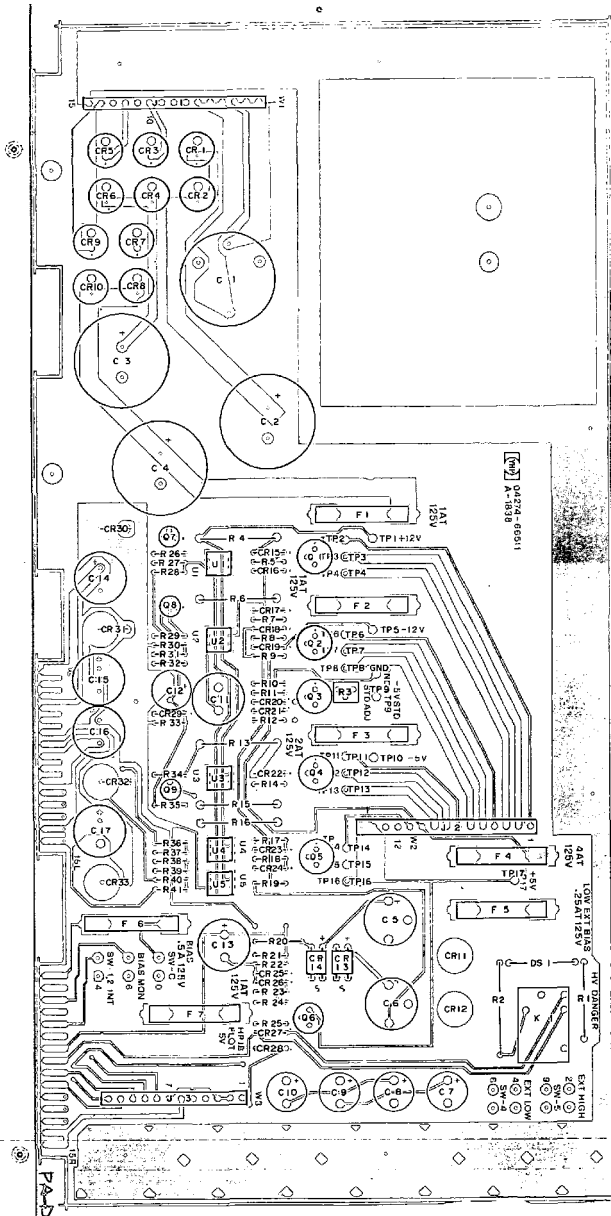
All POWER SUPPLY ASSEMBLY COMPONENT LOCATIONS.
